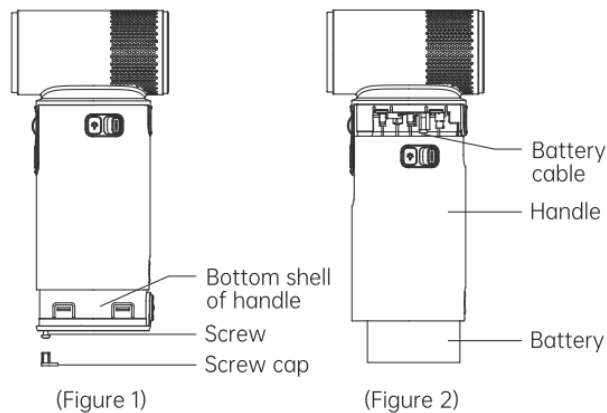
/ Figure 2 — Battery cable · Handle · Bottom shell of handle · Screw · Battery · Screw cap
